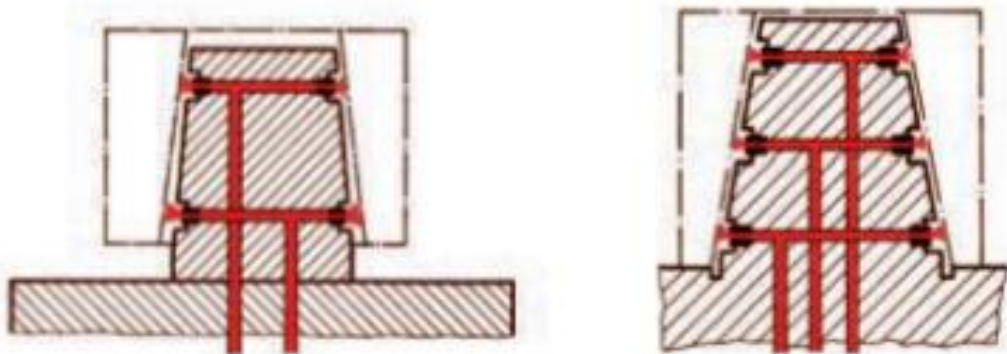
Mounting the pneumatic system on the inner surface of the cone [2]
